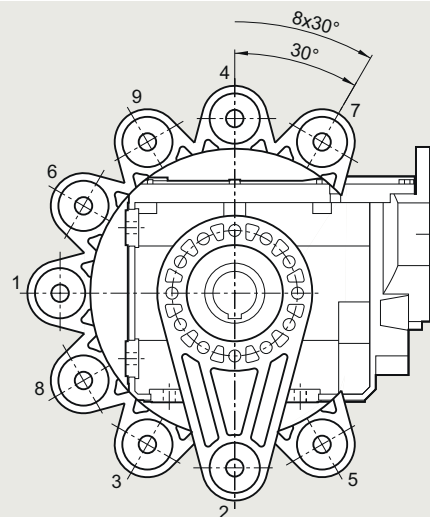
/8 Bevel gearboxes BAD, sizes 39 and 49
